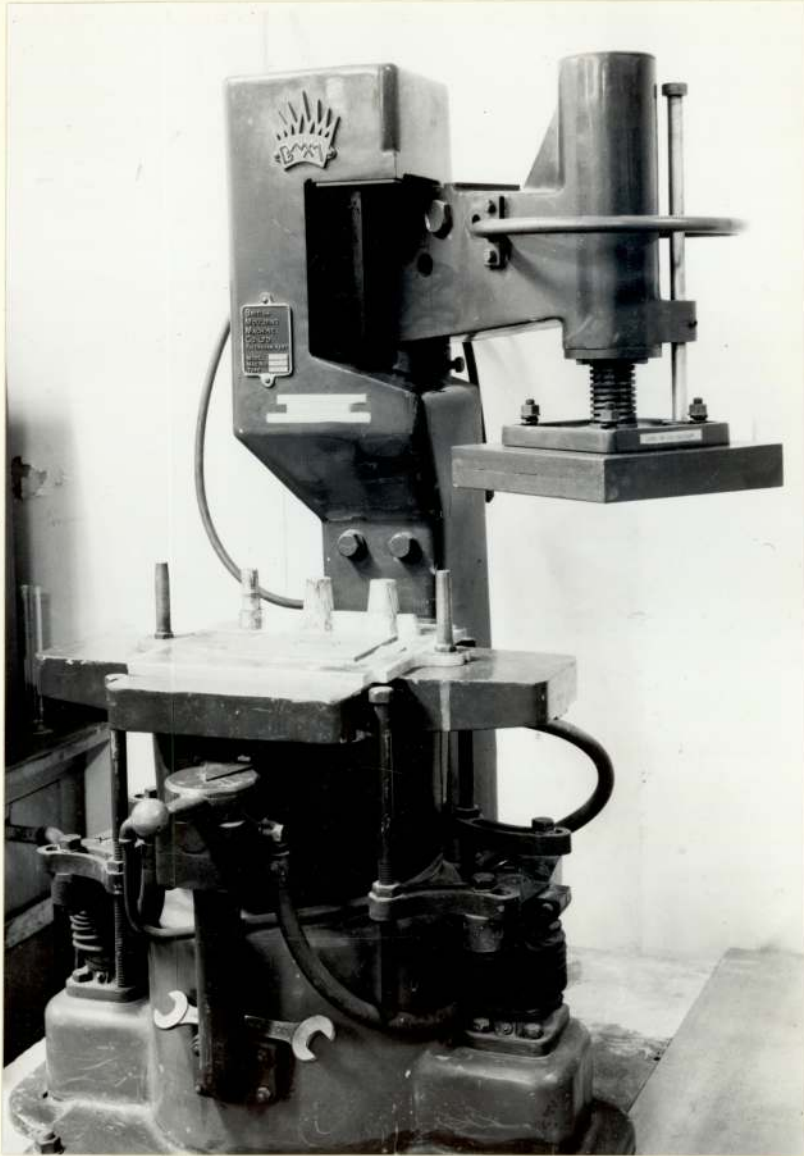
Illustration of jolt squeeze moulding machine with test plate pattern in position.
